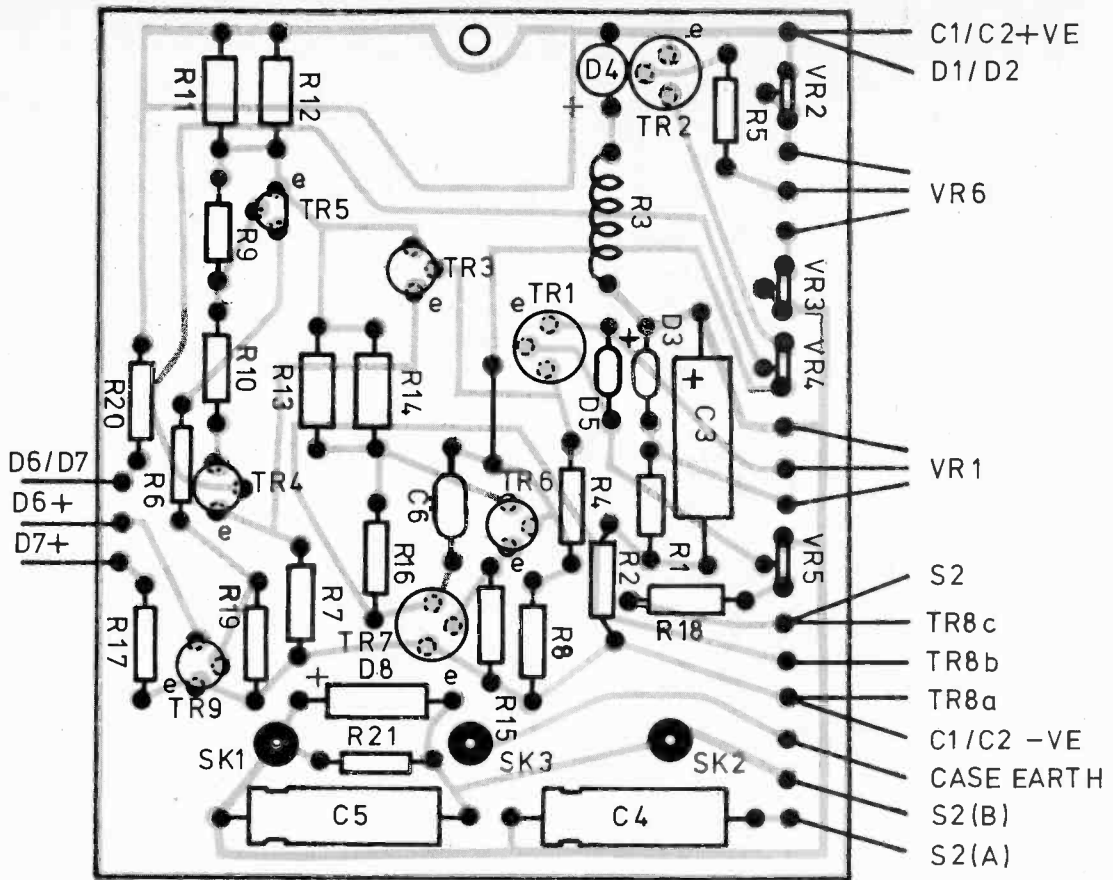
(above) Component layout and wiring details for p.s.u. board
